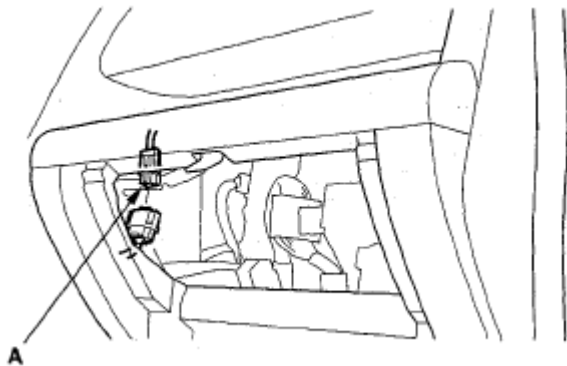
Identifying Front Passenger's Airbag 4P Connector
